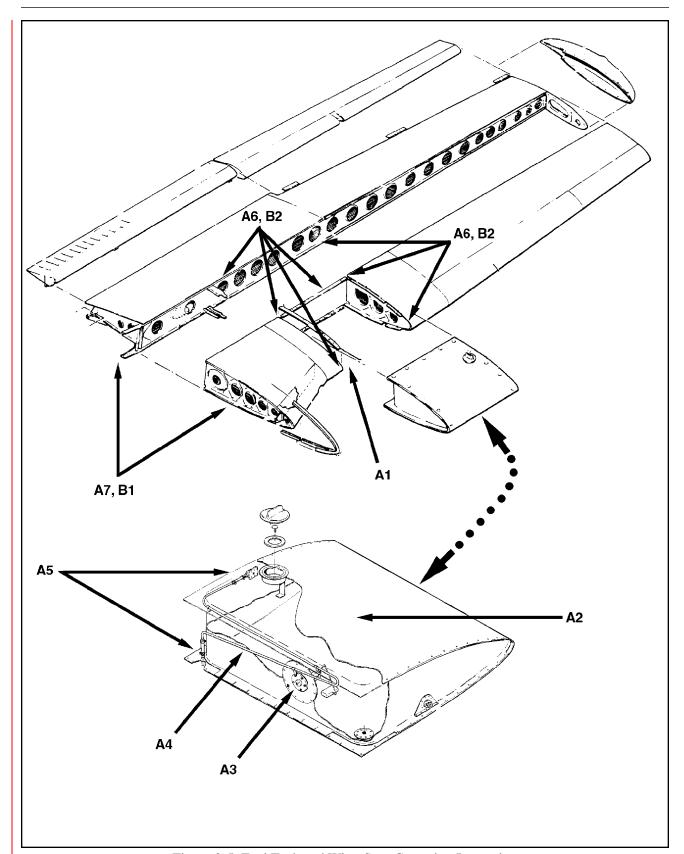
Fuel Tank and Wing Spar Corrosion Inspection
